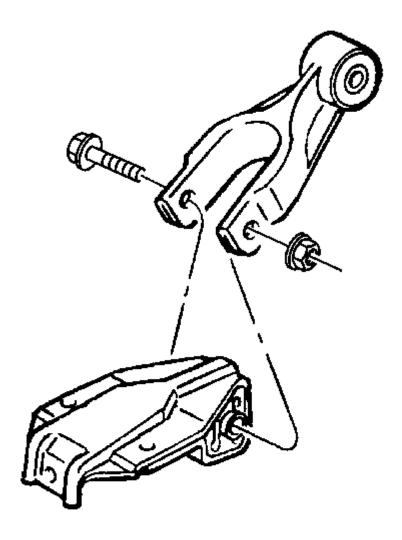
Removing Engine Mount Strut Bolt & Nut - Right Courtesy of GENERAL MOTORS CORP.
